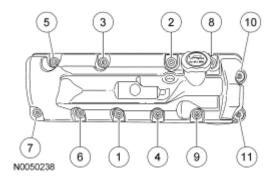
Valve Cover Torque Sequence Courtesy of FORD MOTOR CO.
